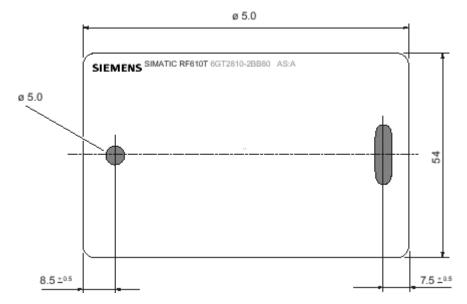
Dimensional drawing of SIMATIC RF610T
